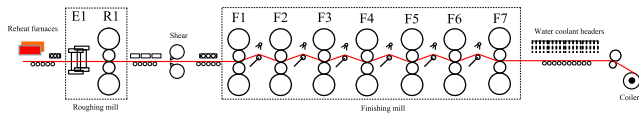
Layout of a 1700 mm hot strip mill in a factory.
